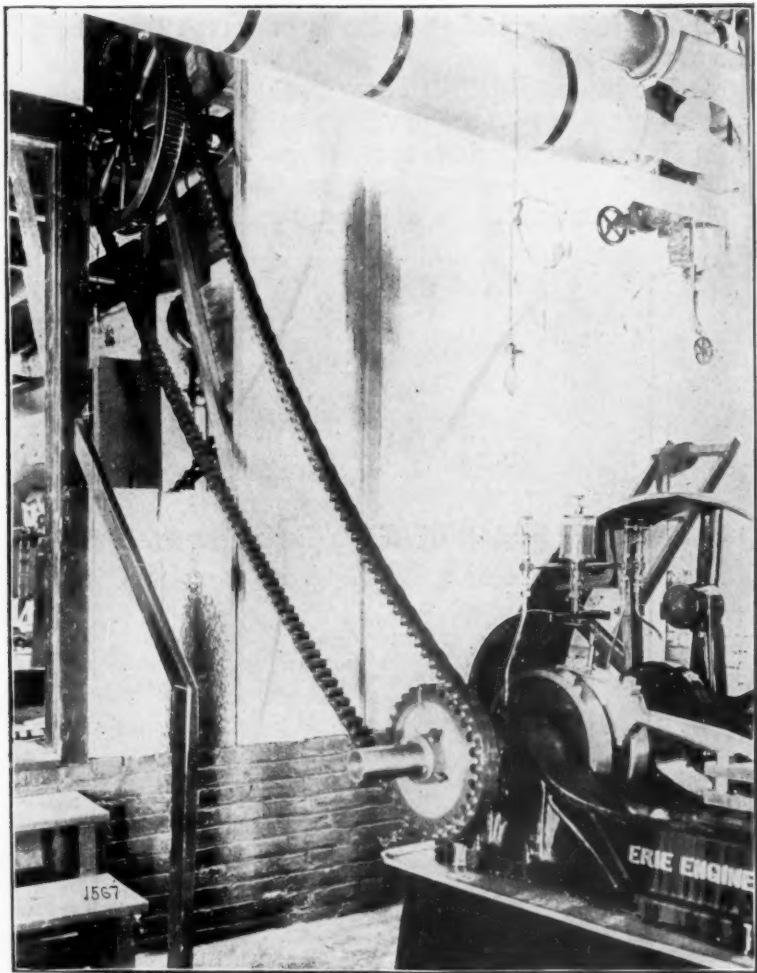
CHAIN DRIVE, 25 HORSE-POWER ENGINE TO LINE SHAFT, CHAIN SPEED 900 FEET PER MINUTE.
